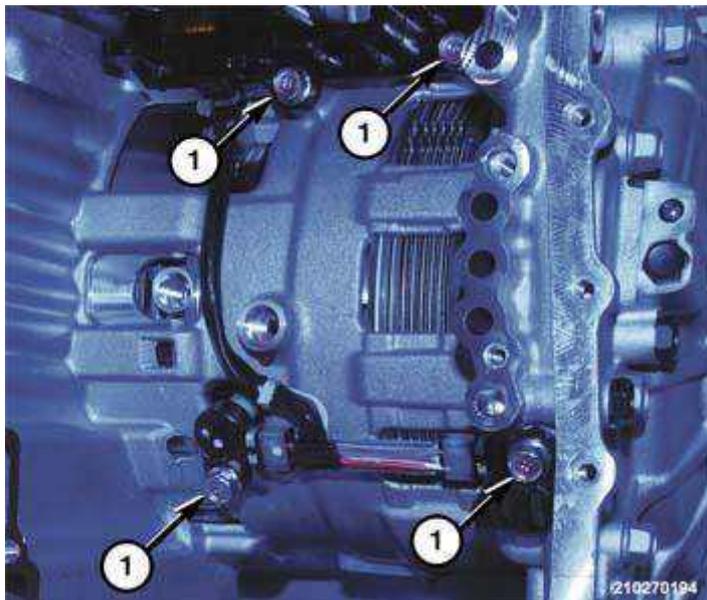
Speed Sensors, Main Wire Harness & Bolts
